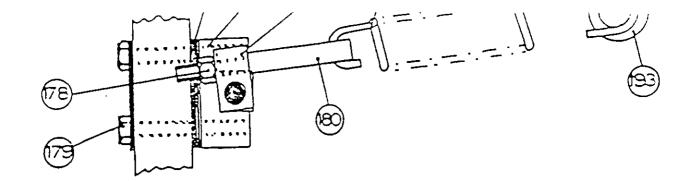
OPENING SPRING AND MECHANISM ADJUSTMENT
